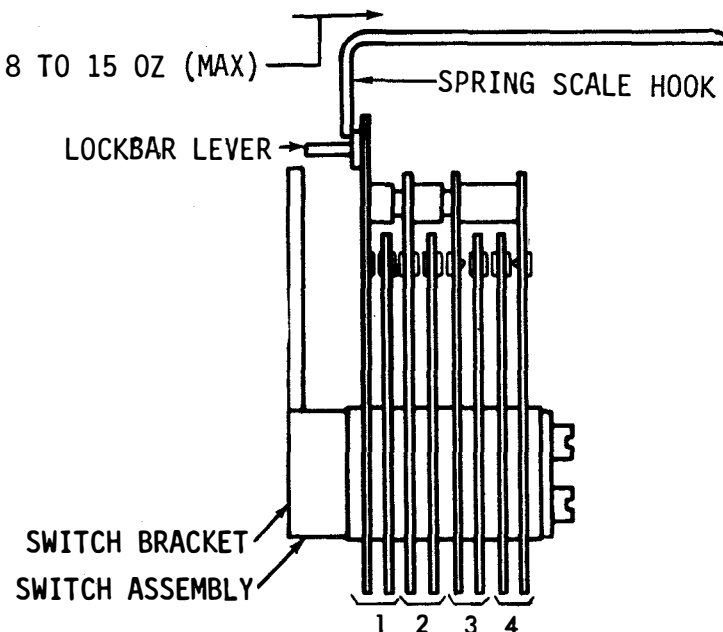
Keyboard Lockbar Switch and Lockbar Switch Spring
